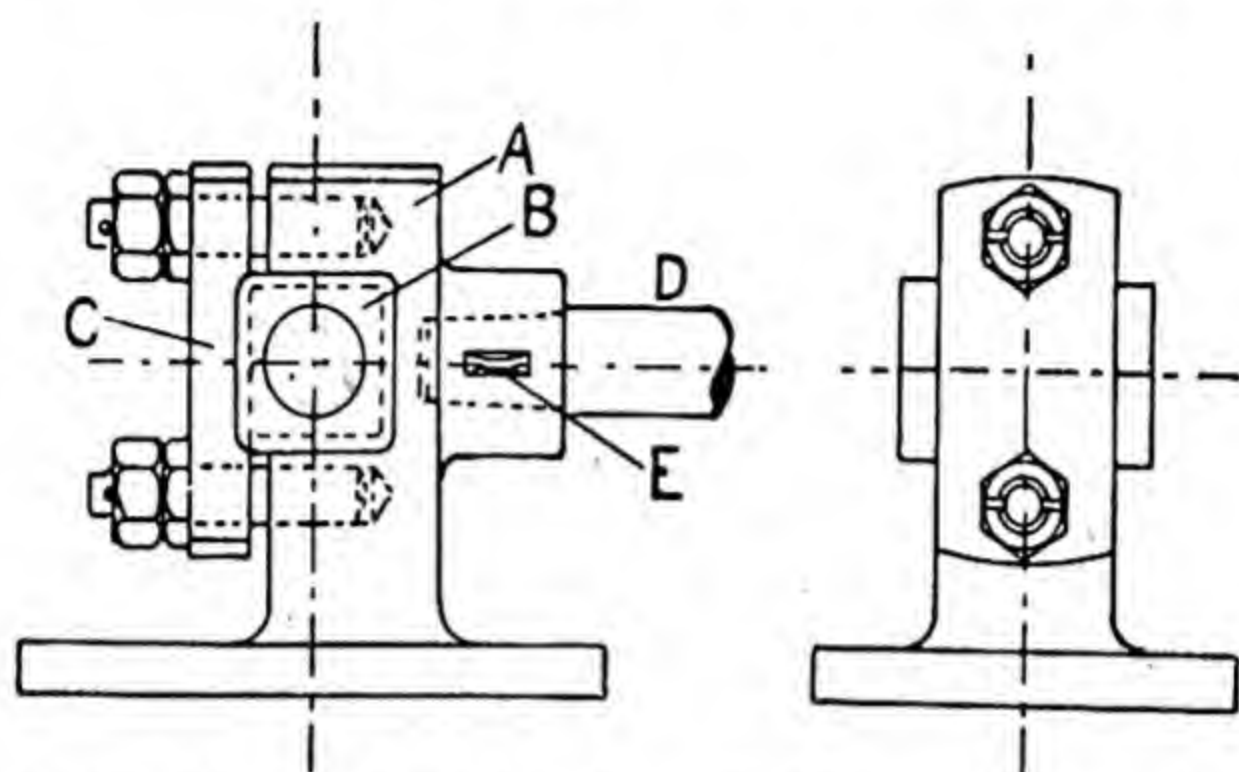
Side and end elevations of a crosshead for a small steam engine.
